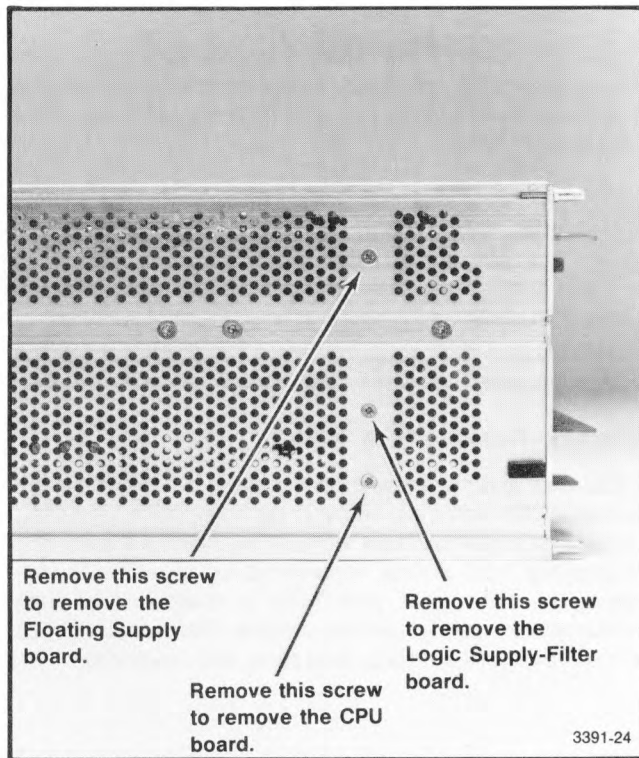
Bottom view of instrument showing screws holding boards.
